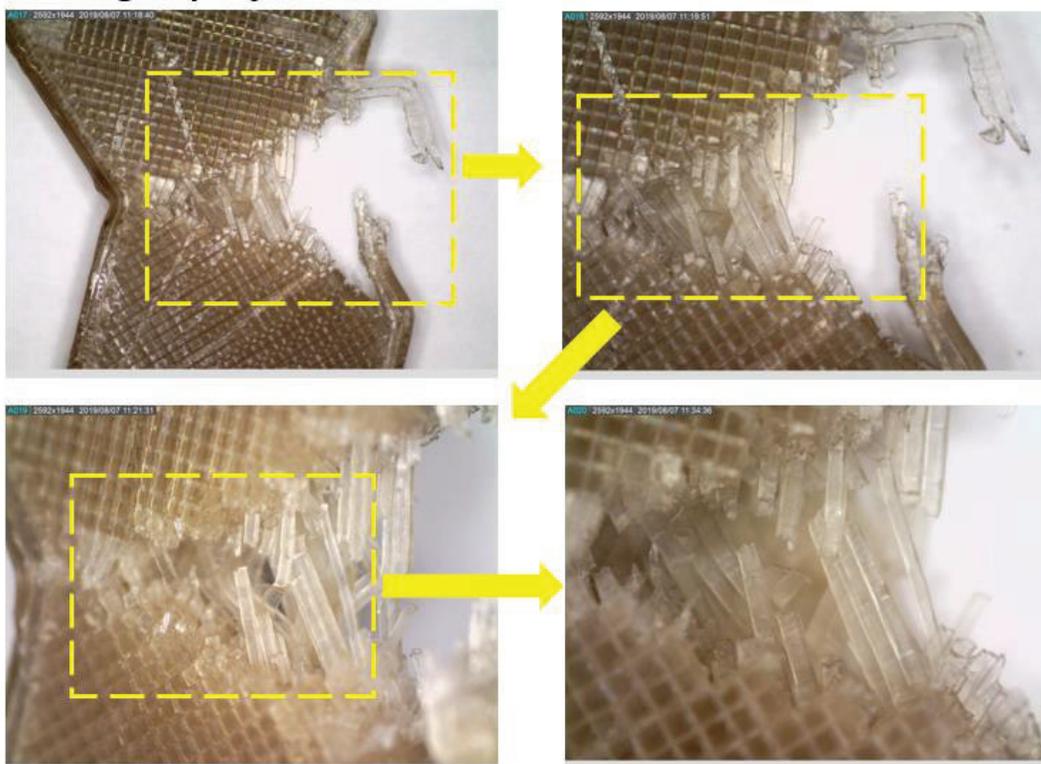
Fracture face of the 3D printed PEEK impact specimen
